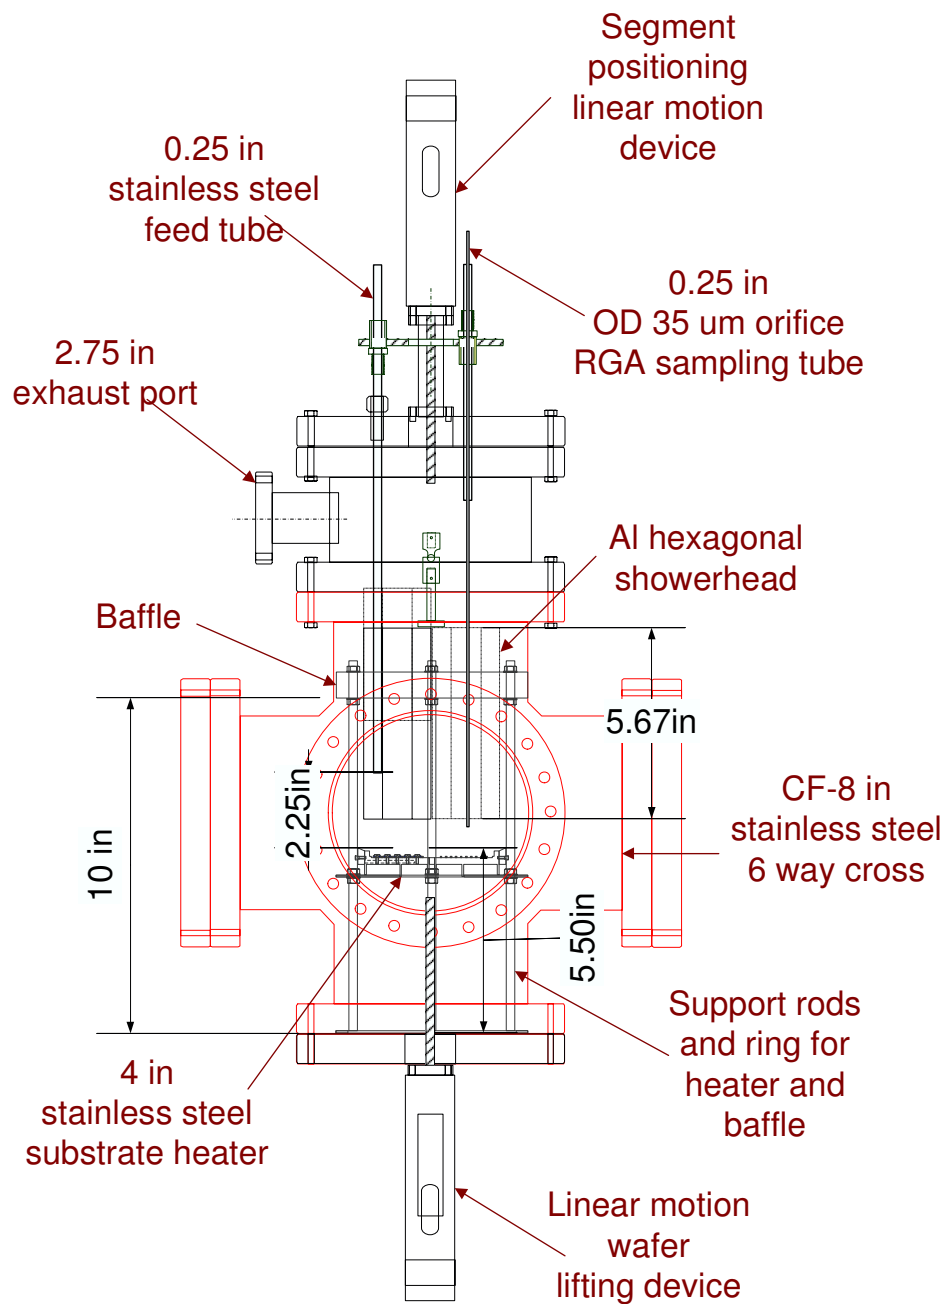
Detailed mechanical drawing of the new reactor chamber, showerhead and heater with critical dimensions such as wafer to feed tube distance, segment length, and heater and baffle positions.
